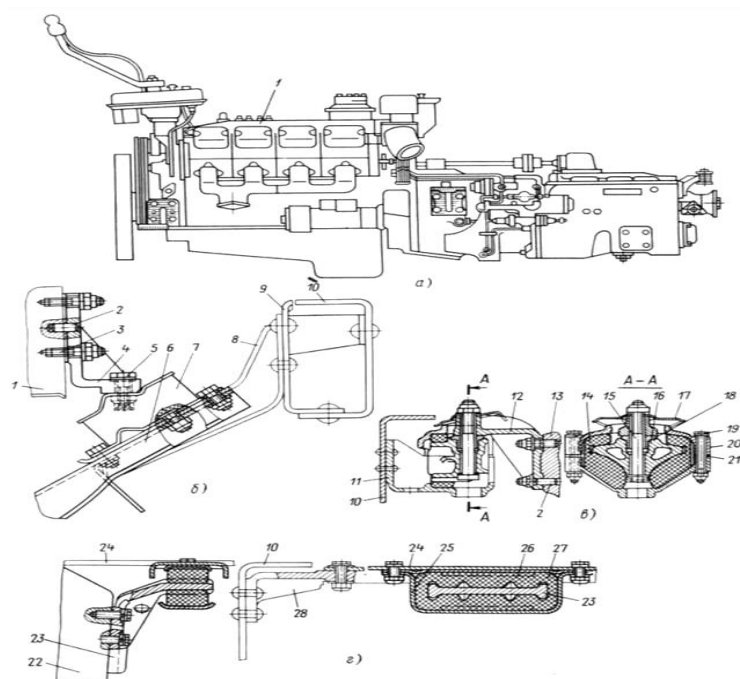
The configuration of the KamAZ-5320 car engine:
